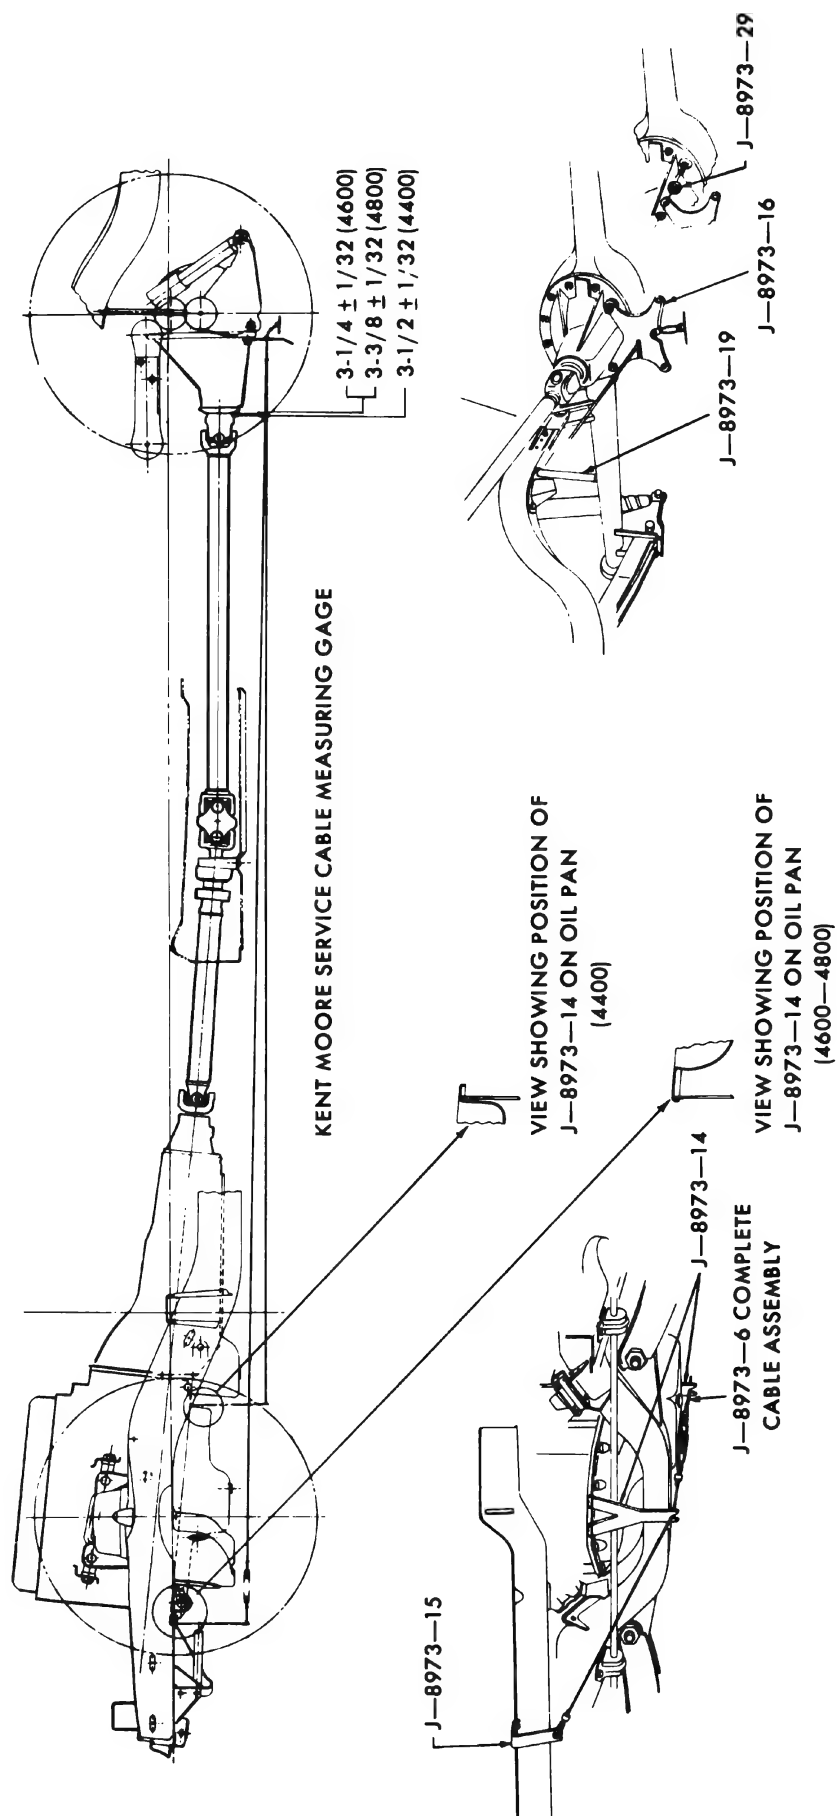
Checking Rear Universal Joint Angle—4400-4600-4800 Series
